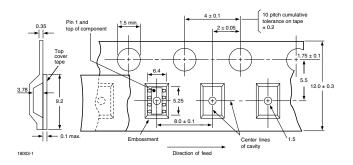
Tape Dimensions, 2000 Parts per Reel
